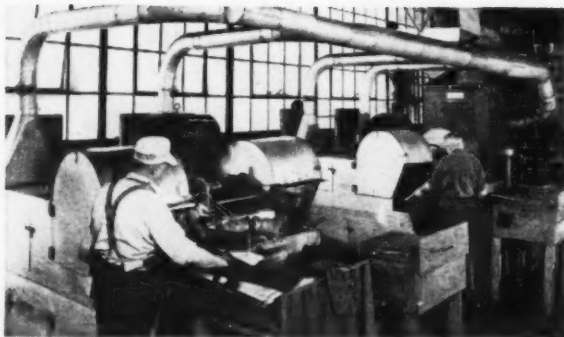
Roll polishers are exhausted through specially designed hoods. 1000 cfm is exhausted from each hood.
